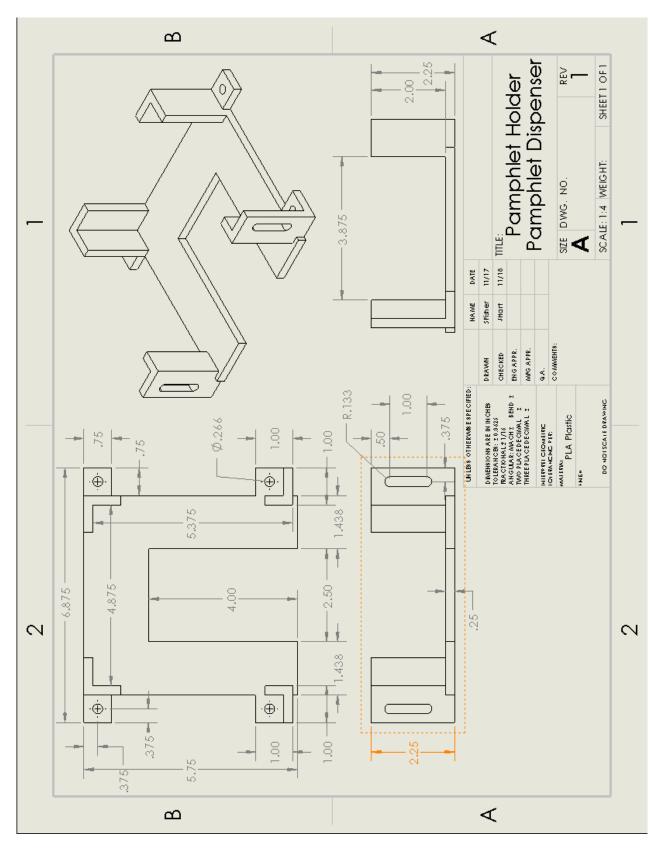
Prototype Pamphlet Dispenser Pamphlet Holder Drawing (not to scale)
